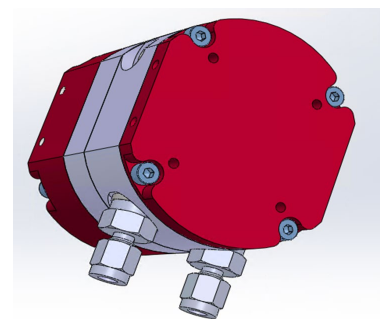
MIRS8-T-V Transmission oil sensor with assembly/mounting holes at the bottom and side of the sensor
